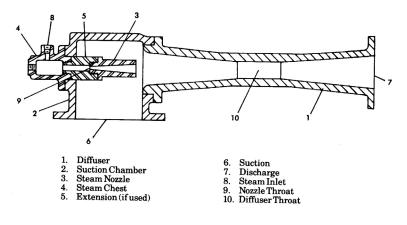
Typical steam-jet ejector stage assembly. (Courtesy Heat Exchange Institute)
